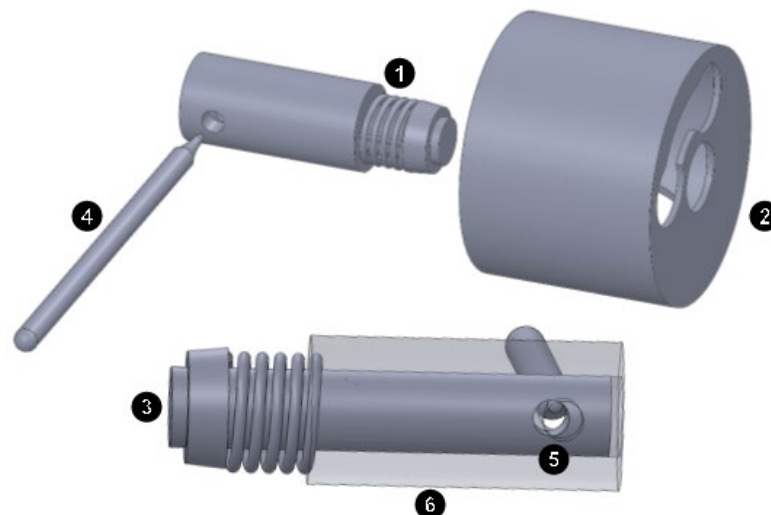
The locking mechanism as parts assembled to components. The lock actuator, that is the handle is not displayed.
